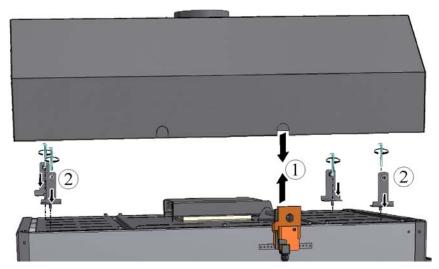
Example: Positioning the exhaust hood/s (similar to picture)
